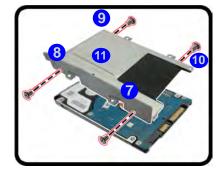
14 Secondary HDD Assembly Removal (Model B)
